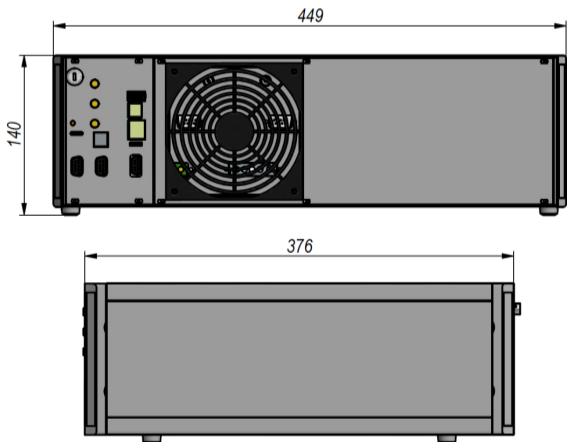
Outline drawing and dimensions of PS8000 series power supply
